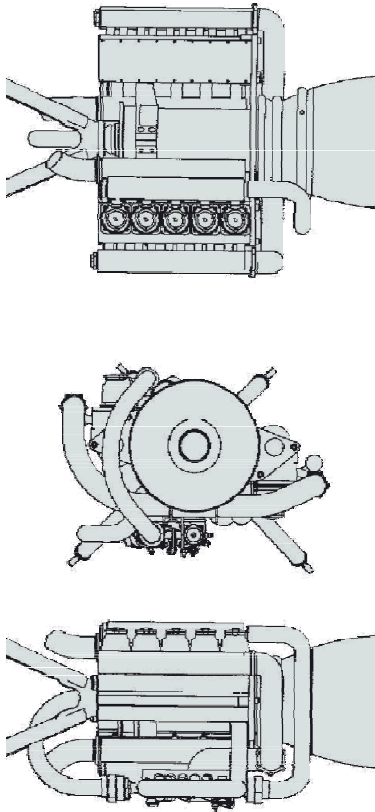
Concept Drawing of the Demonstrator VL Engine
